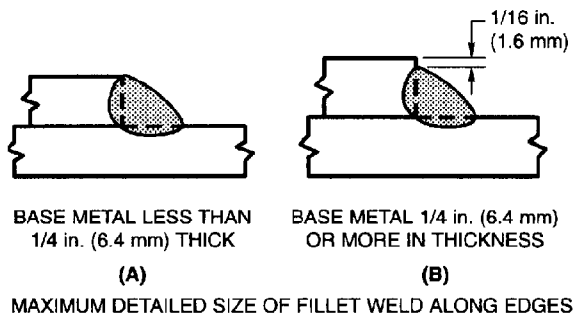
Details for Prequalified Fillet Welds (see 2.4.5)
